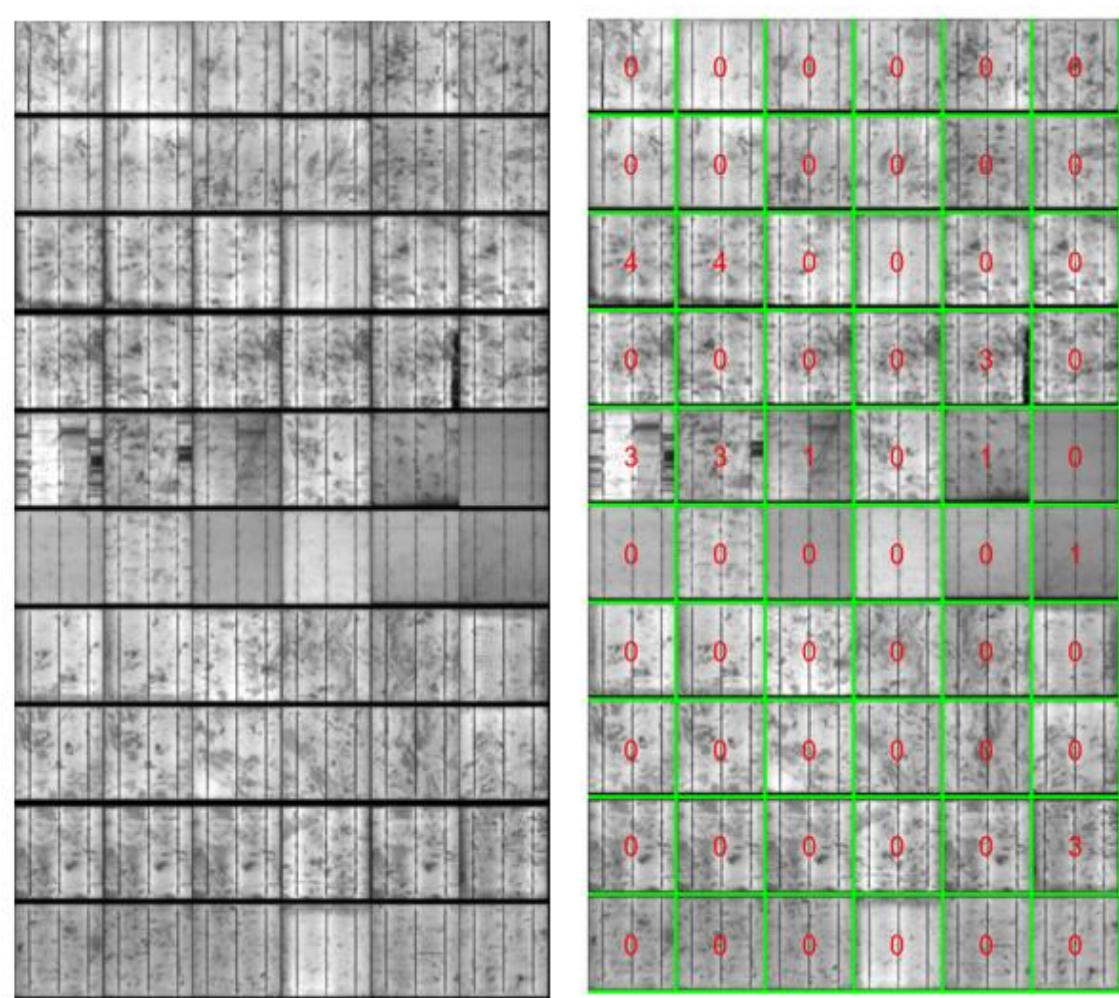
EL image before and after automated crack processing, with 0 indicating a healthy cell and 1-5 representing specific crack types (line cracks, soldering anomalies, complex cracks, Edge ribbon cracks, and PID).
